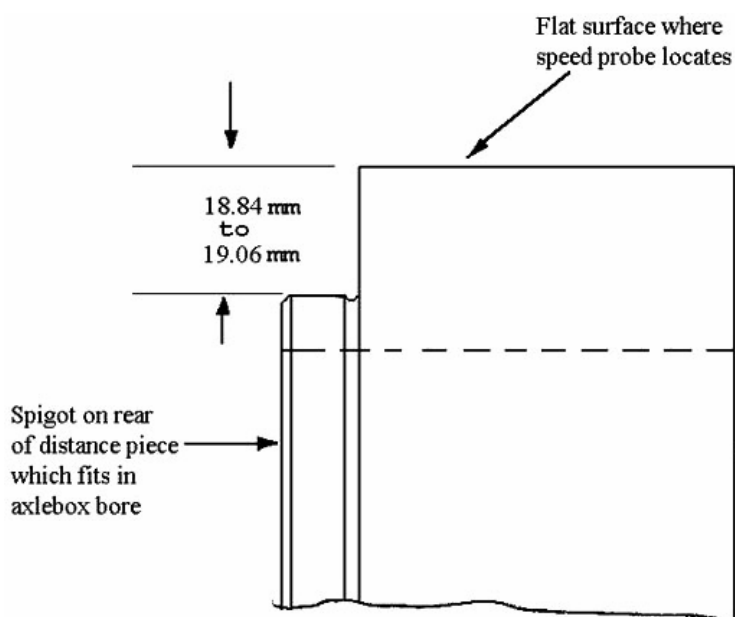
Dimensional Check on Revised Design for Westinghouse Equipment
